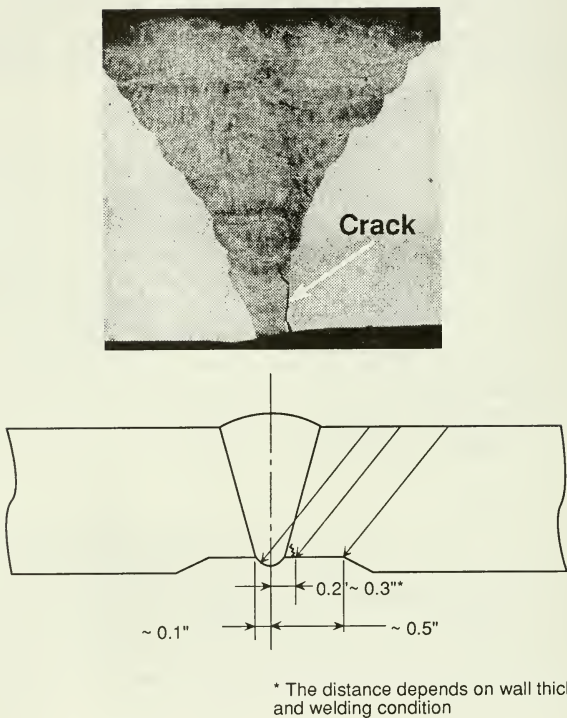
Sectional view of Pipe weld showing typical IGSCC and geometrical reflector locations
